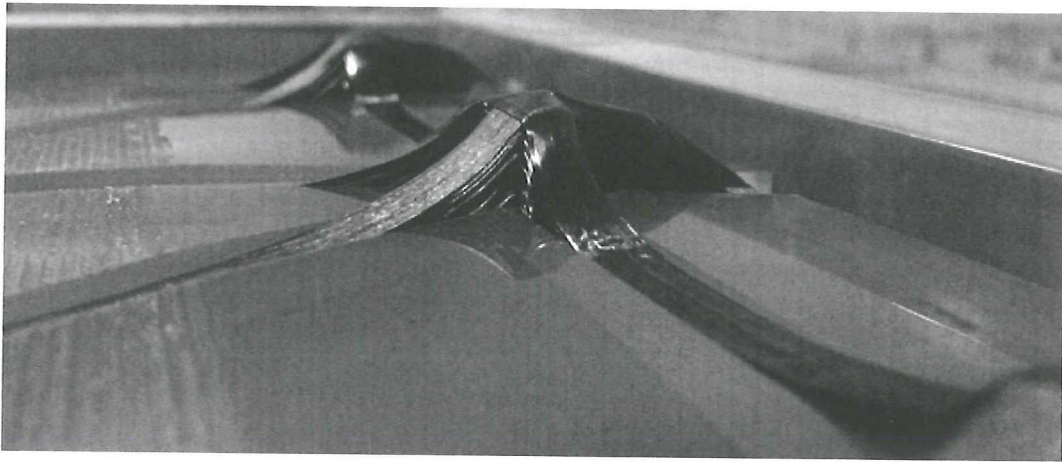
Finished layup showing node sticking above rubber expansion tooling
